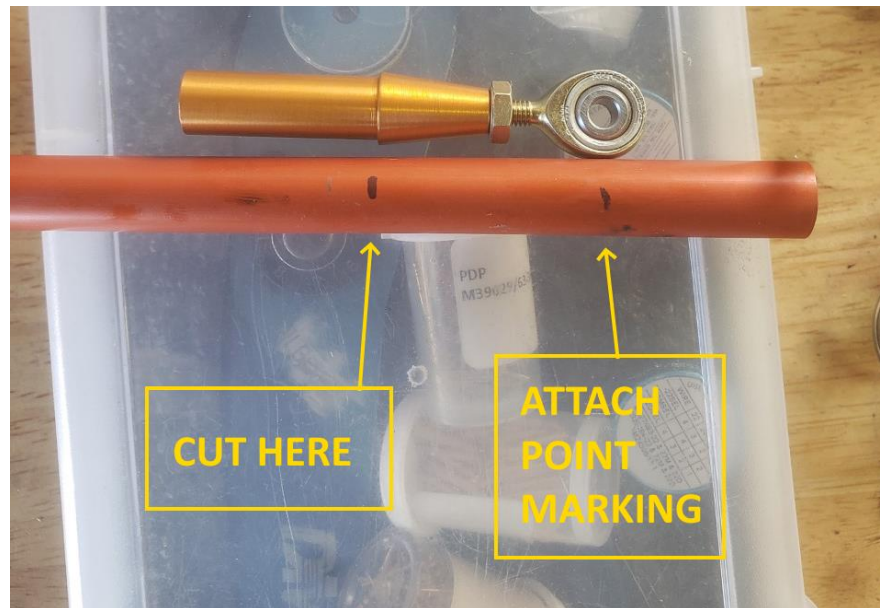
PUSH PULL TUBE TRIMMING
